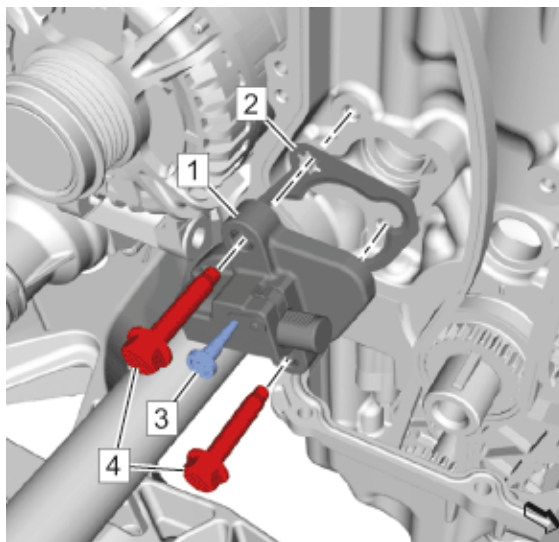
Timing Chain Tensioner Tool, Timing Chain Tensioner, Bolts And Gasket
